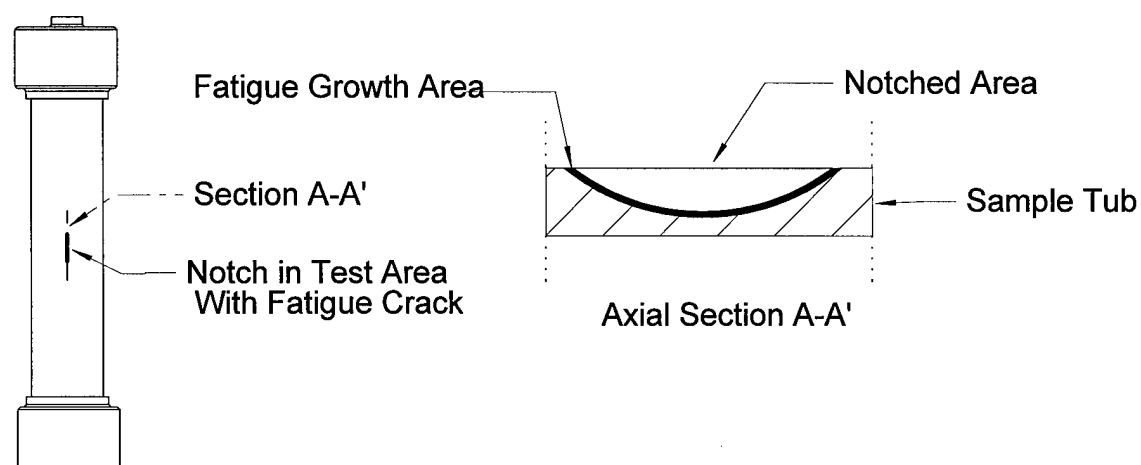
Schematic of Tube Samples With Fatigue Pre-Cracks in Test Area.
